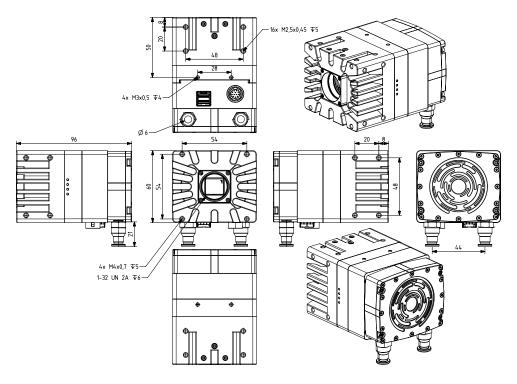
dimensional drawing MX161l203l245xG-SY-X4G3-xxx-SFF-WATERCOOLED
